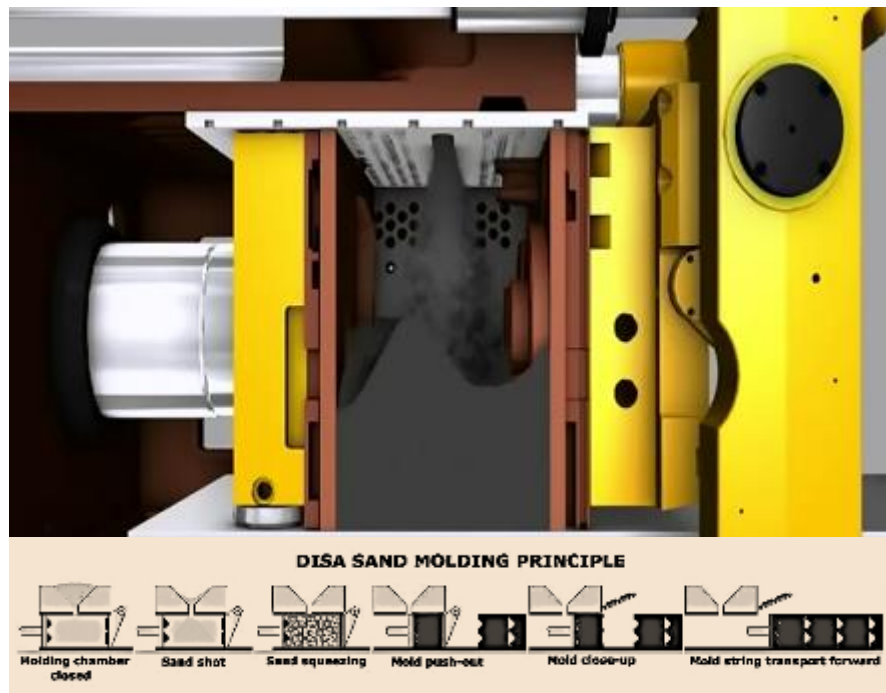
Automatic flaskless moulding with vertical parting line. 1. Moulding chamber closes and fills by a sand shot, 2. Sand squeezing, 3. Right hand side pattern plate swings away and finished mould is pushed out from moulding chamber. A string of moulds where casting cavities form between two molds, move forward ready for pouring. (Disa Group 2016.)
